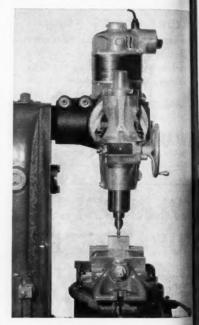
Dalrae Midgetmill, designed to the tate drilling, boring or milling.
